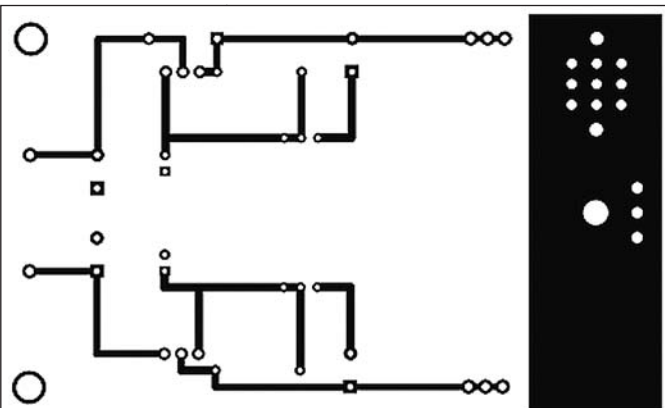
PCB #4 bottom copper layer (2.5" x 4.0").
